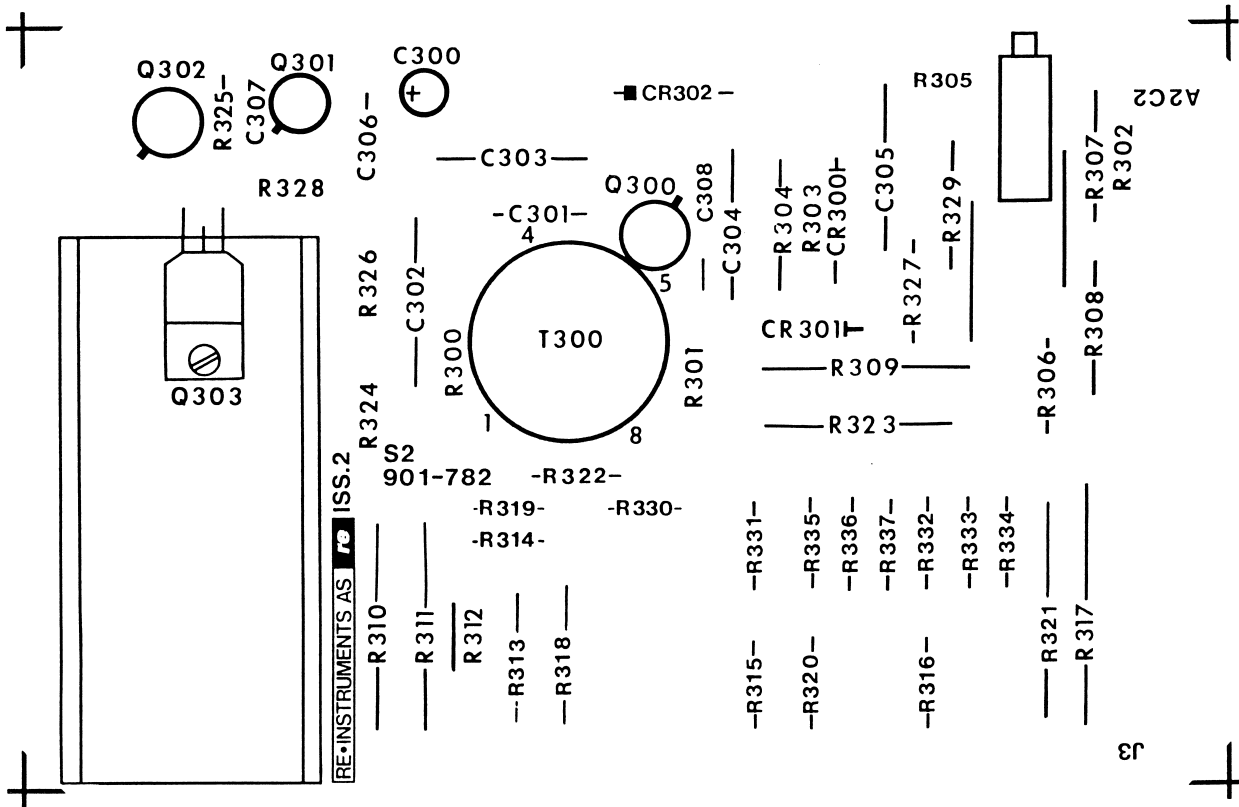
J3 Voltage Supply Printed-Circuit Board, Code 901-782
